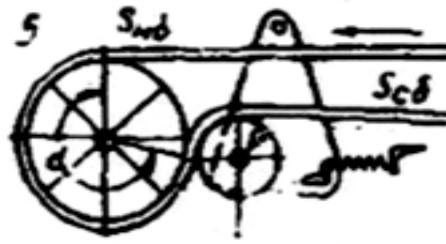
drive Diagram of a belt conveyor with a pressure roller.
